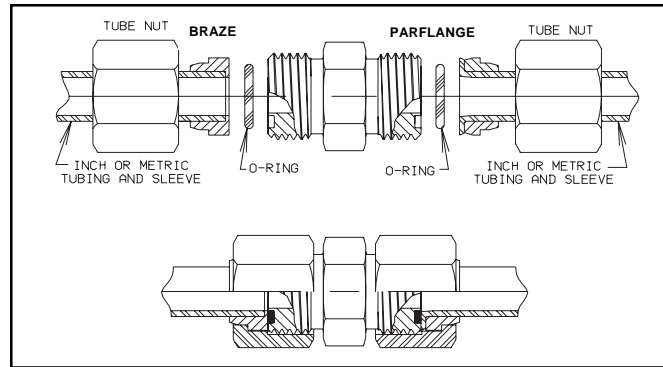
Braze and Flange Style Seal-Lok Fitting Components and Assembly
